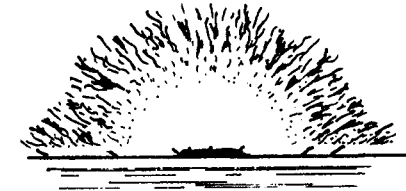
Fractographic Signs of Machining Damage or Scratches
